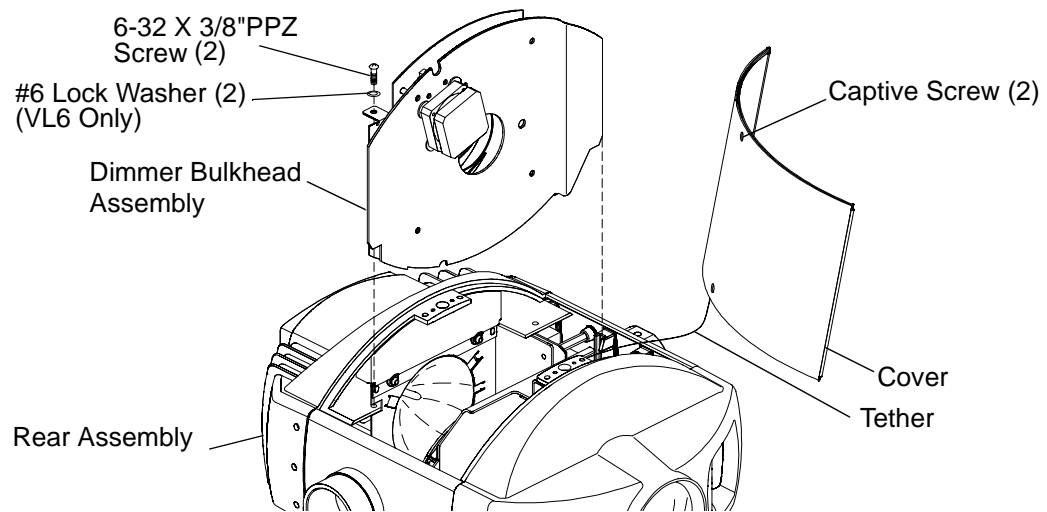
Dimmer Bulkhead Assembly Replacement
